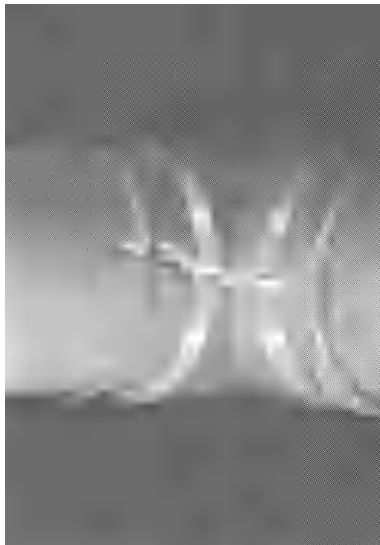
Close up of left-hand corner of above specimen after test (7 bar, 95 °C); failure occurred within the weld plane of the T-joint itself, possibly in the very corner.
